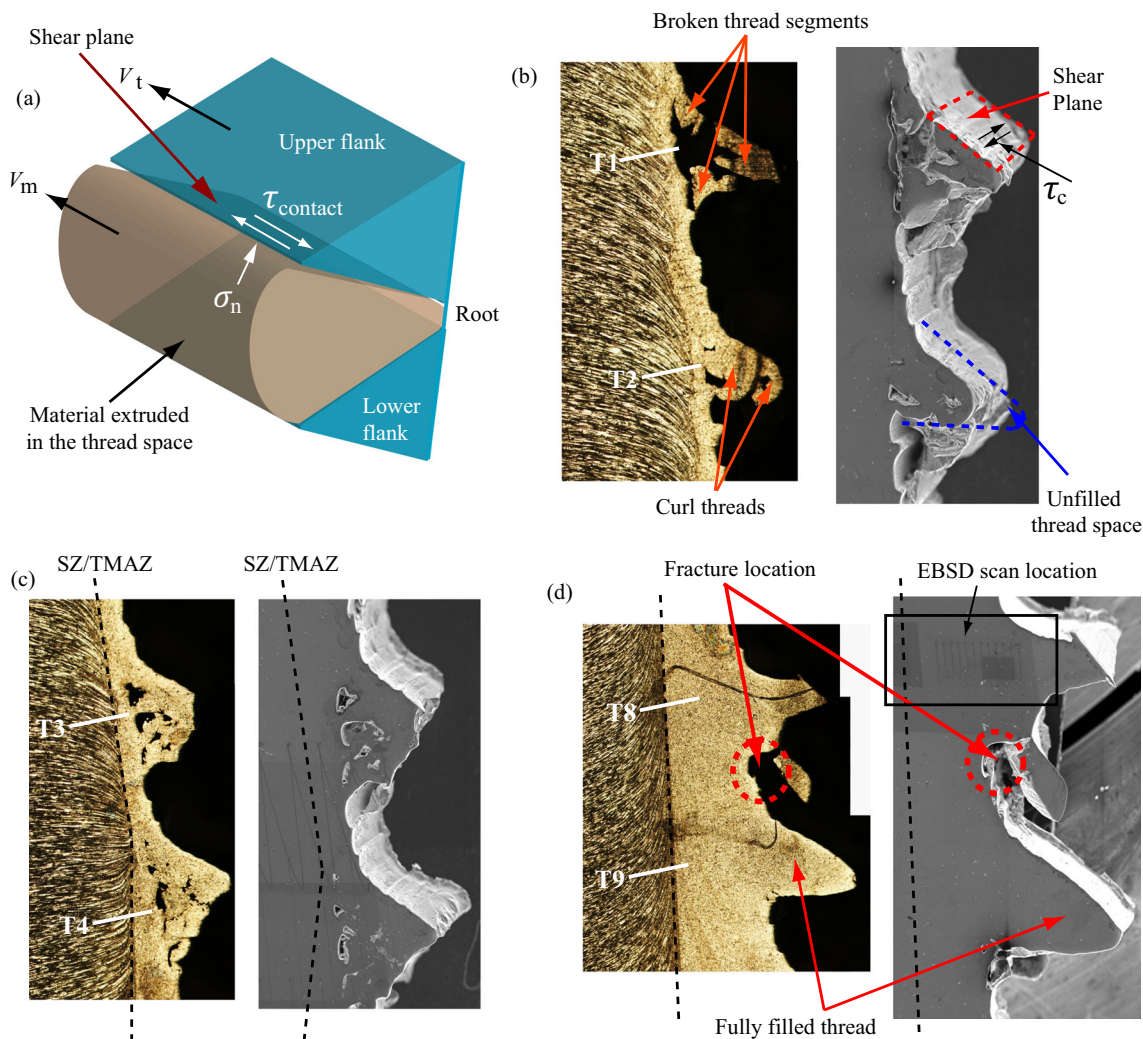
a Schematic illustration of the material extruded in the thread space and b–d magnified views of the thread material morphologies along weld thickness
